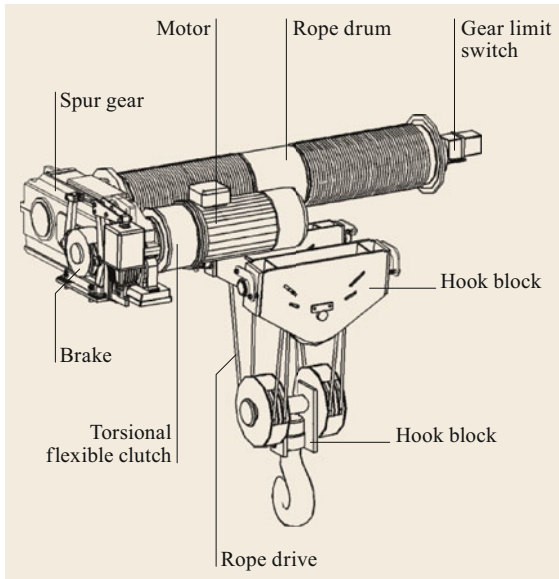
Standard hoist with open design (Demag Cranes & Components, USA)
